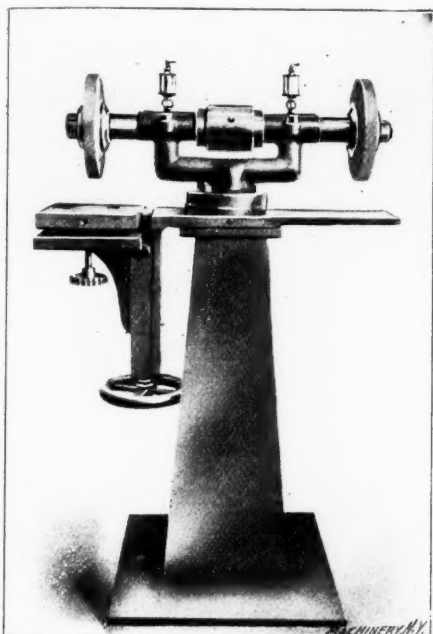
Combined Surface and Tool Grinder built in the School Shops.
